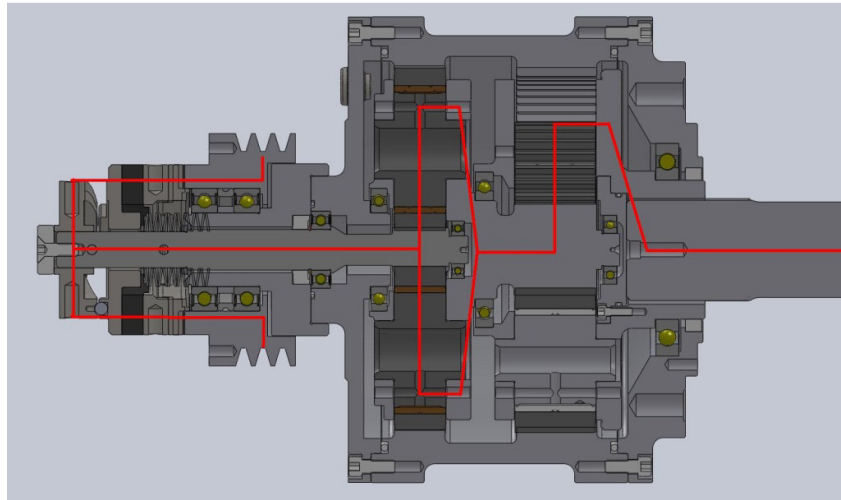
GB-57 gearbox cross-section with the path of power transmission
